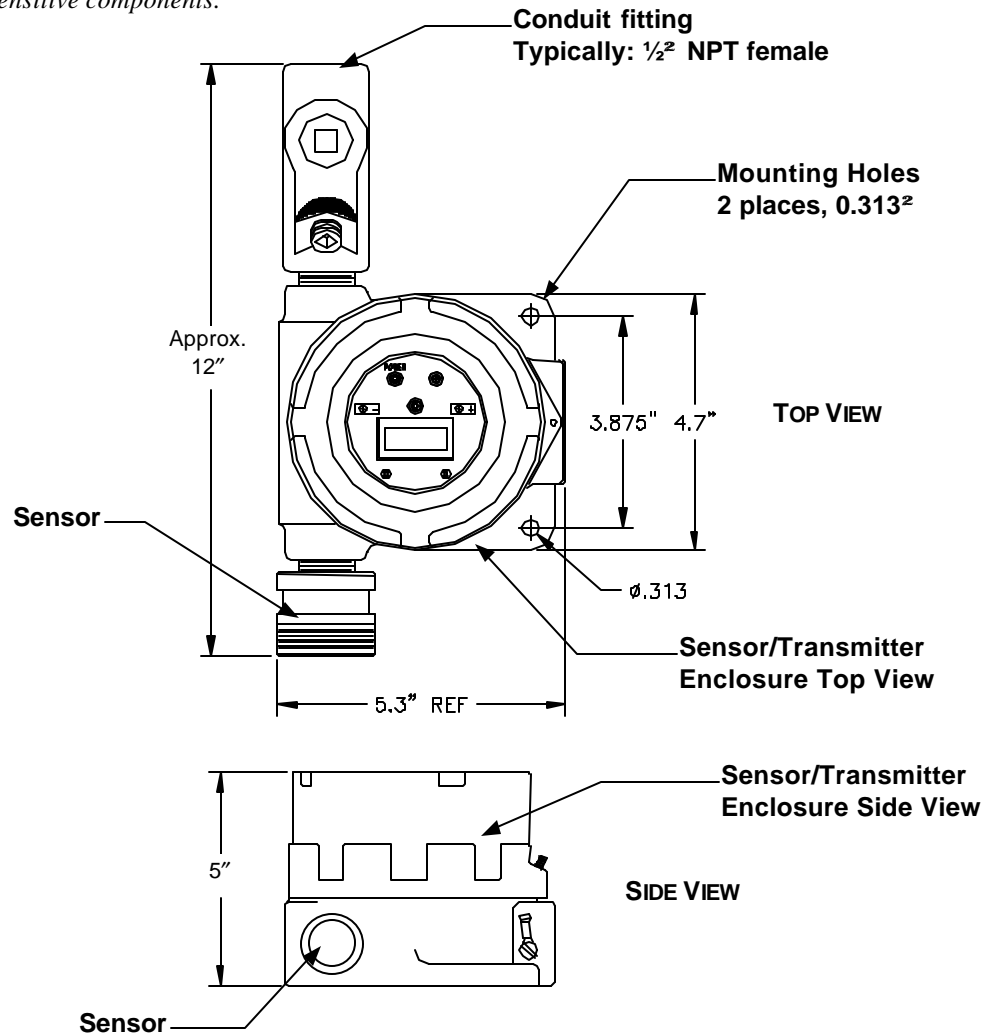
Mounting Dimensions of Catalytic Combustible Gas Sensor/Transmitter
